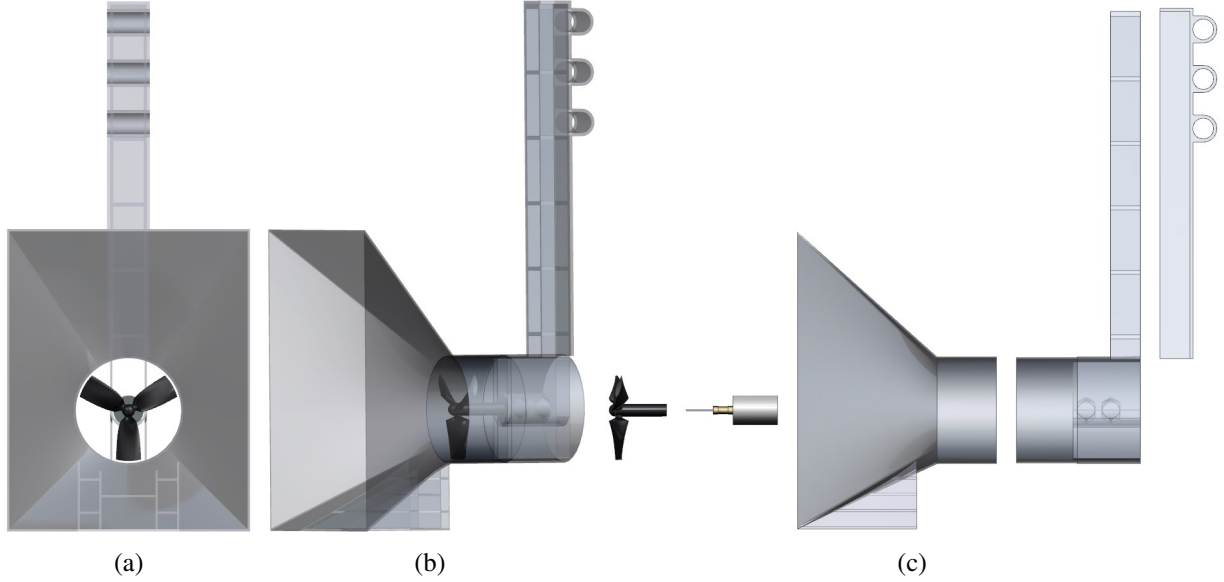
The proof of concept design (a) Front view (b) Angled assembled view (c) Exploded side view
